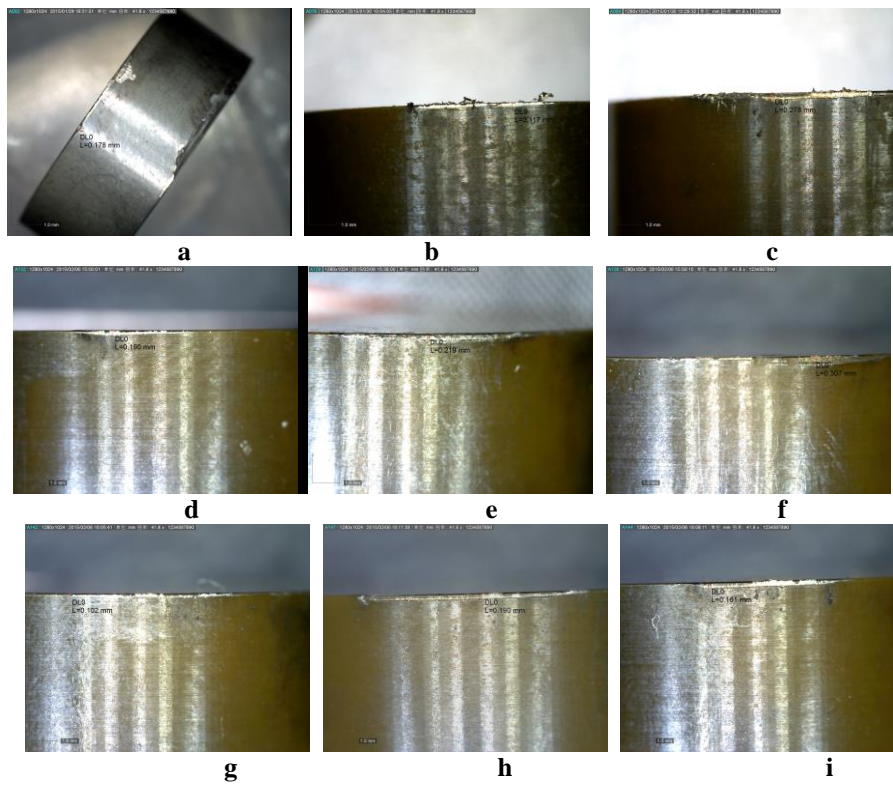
Flank Wear Observed On Ceramic Tool At Different Cutting Parameters
